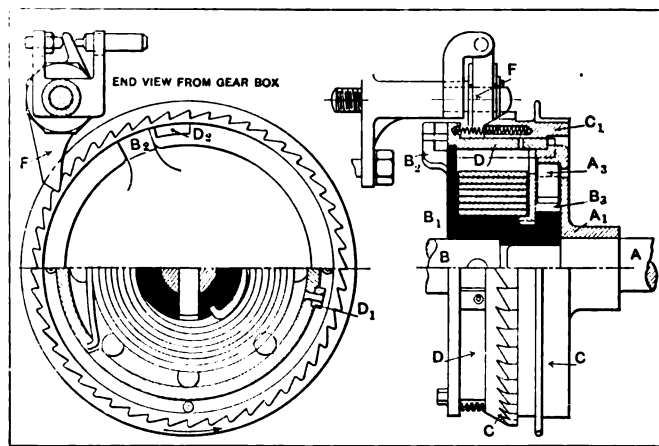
Sectional view of Goodhart engine starter, an English invention
